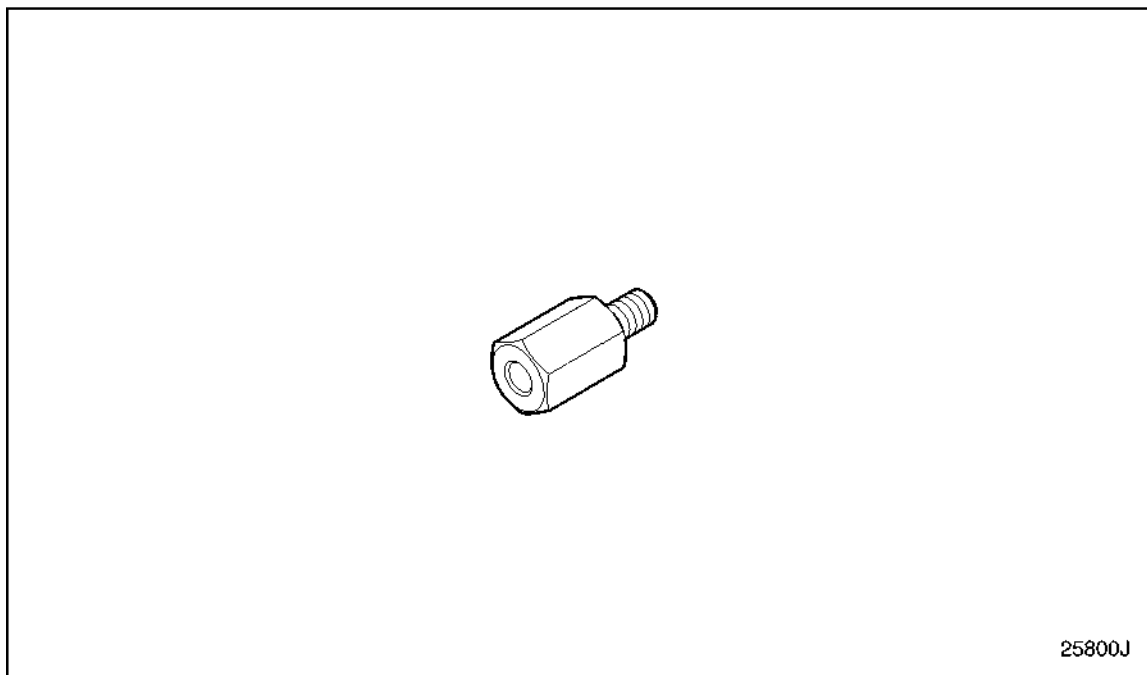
Flywheel Runout Gauge Adapter,J 9737-11
